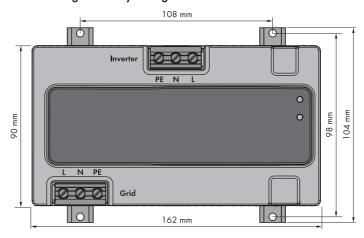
Dimensions of the Sunny Multigate and the drill holes for mounting with screws
